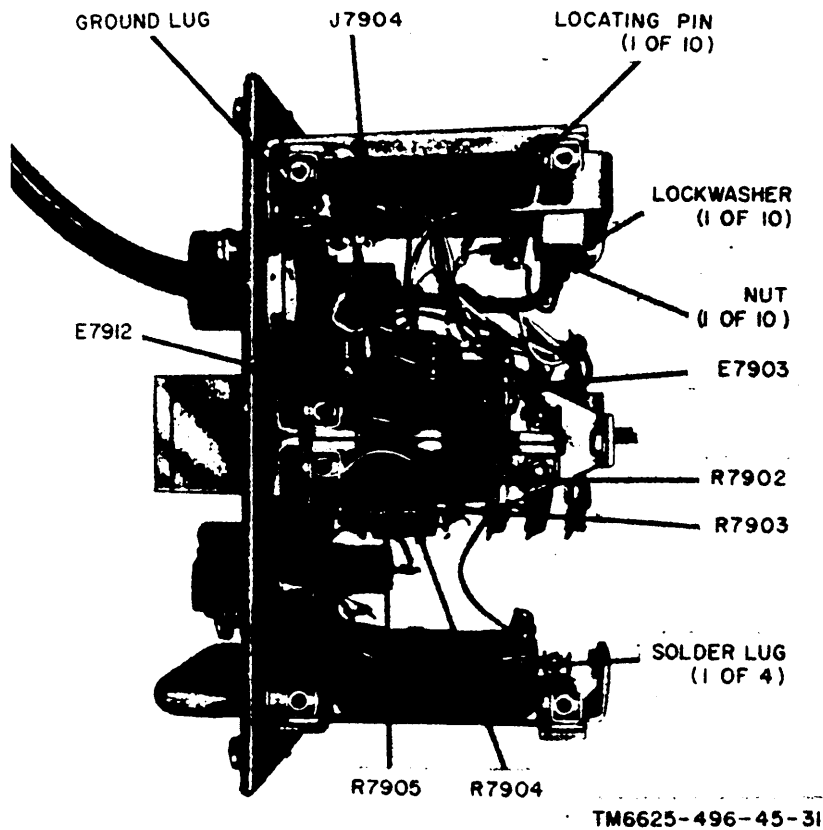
Test Set, Radio TS-1777/VRM-1 front panel chassis, top view.
